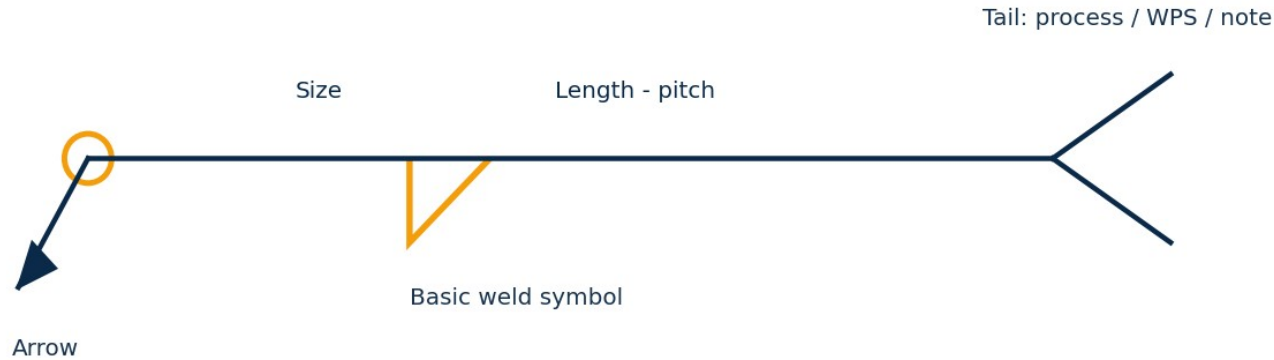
Core elements of a welding-symbol system; ISO and AWS arrow-side conventions differ.
